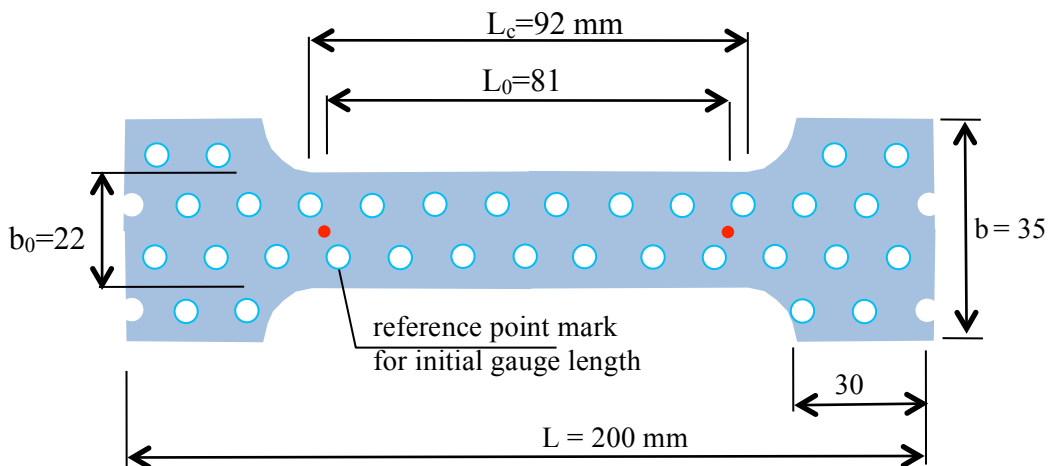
Dimensions of coupons for tensile tests with perforated sheet
